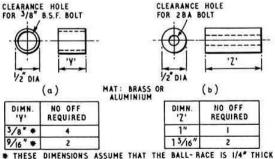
Drawings of spacers for the top bracket, dimensioned to allow the bearing to rotate freely.
